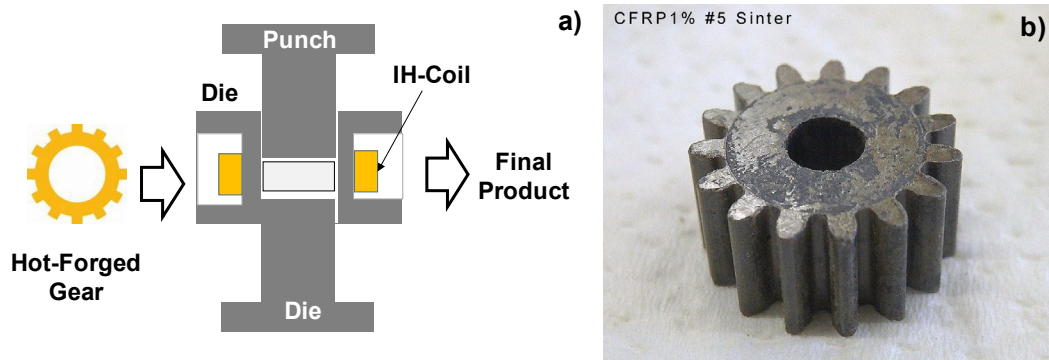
Sinter forging of the gear-shaped intermediates to the final product before polishing. a) Schematic view on the die-set for sinter forging, and b) a gear-shaped product before polishing.
